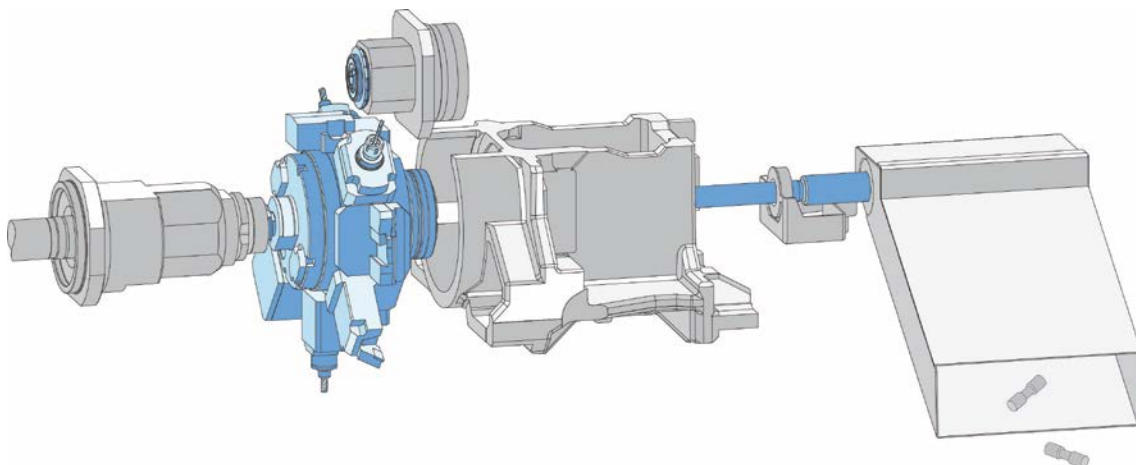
The workpiece discharge unit – fast, safe and gentle Flushing unit for workpieces
